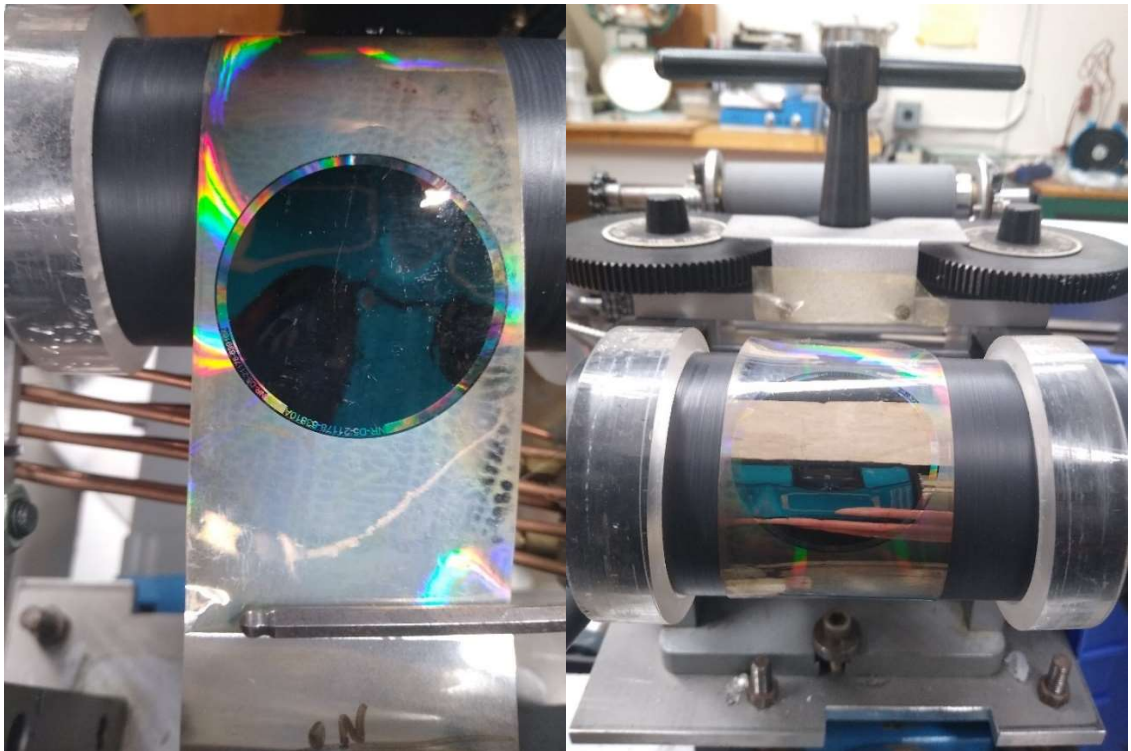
Nickel alloy DVD master mold micro-welded into a SS ribbon loop and installed on the rolling mill or calender roller.
